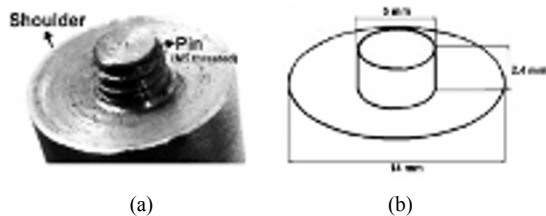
(a) A photo of a tool; (b) a schematic illustration of FSSW tool geometries.
